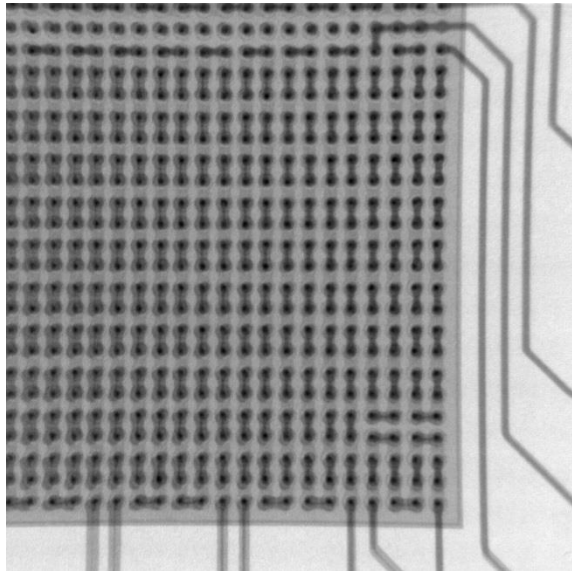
X-ray image of daisy chains designed to check the integrity of the assembly
